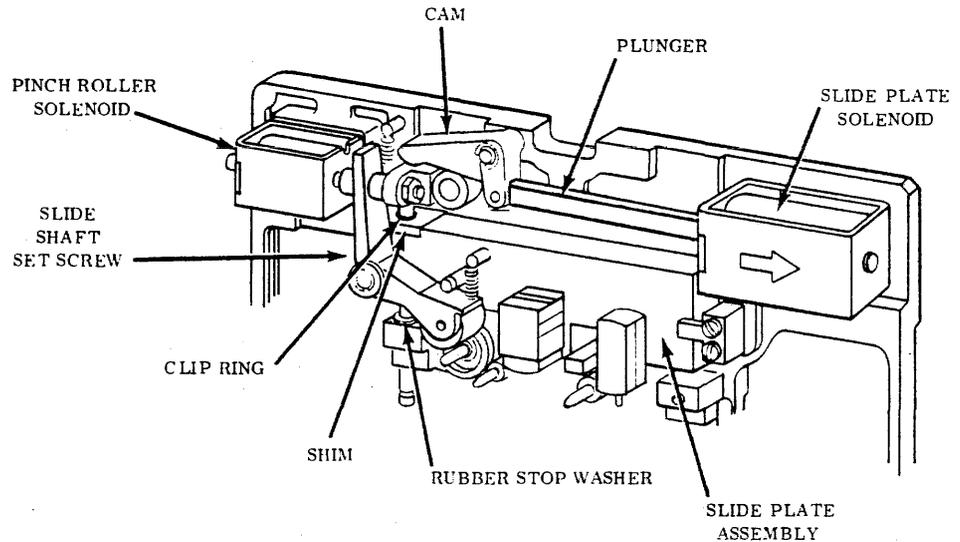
TAPE HEAD SLIDE PLATE SOLENOID
